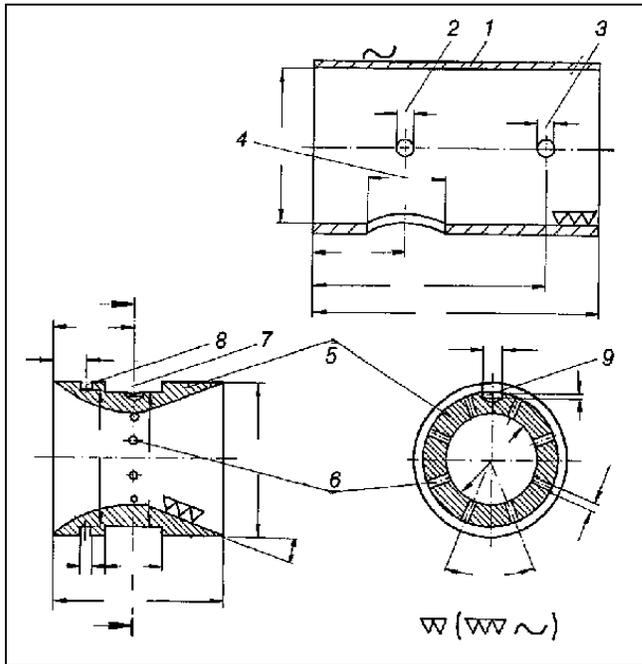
Venturi mixer parts 1 Mixer body (tube), 2 Bore for venturi ring holder bolt, 3 Bore for butterfly valve shaft, 4 Bore for gas supply pipe connection (brazed, welded), 5 Venturi ring, 6 Calibrated bores for gas inlet, 7 Gas supply ring channel, 8 Groove for seal ring (O-ring), 9 Bore for venturi ring holder bolt; all dimensions according to calculations and engine inlet size (refer to Chapter 6).
